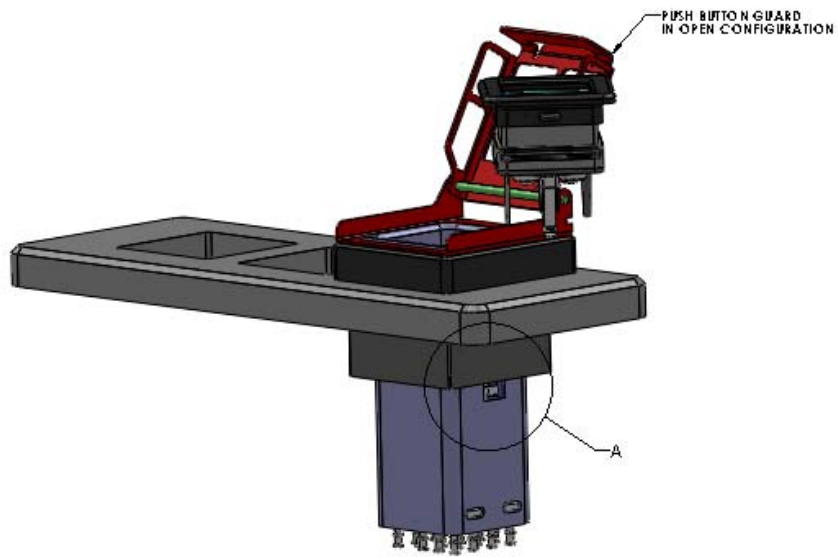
LANYARD AND MOUNTING LUG SCREW DETAILS
